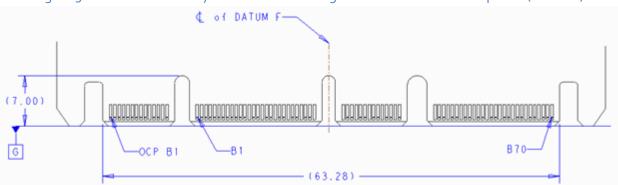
Small Size Primary Connector Gold Finger Dimensions – x16 – Top Side ("B" Pins)
